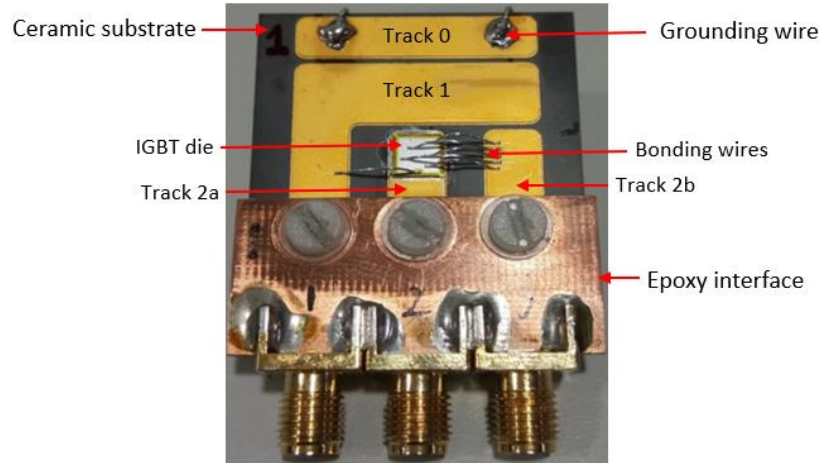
Homemade packaging with IGBT die mounted on Track 2a in measurement condition
